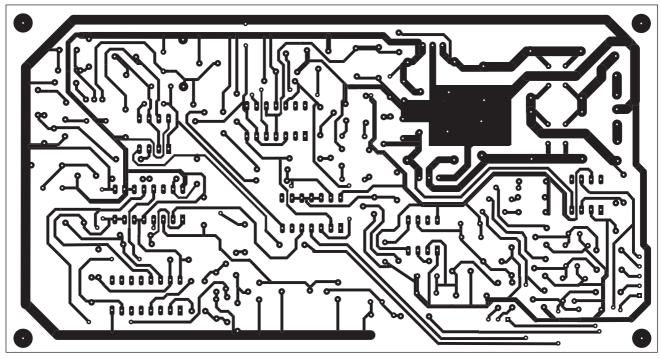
Actual-size, single-sided PCB layout for the circuit shown in Figs 1 and 2
